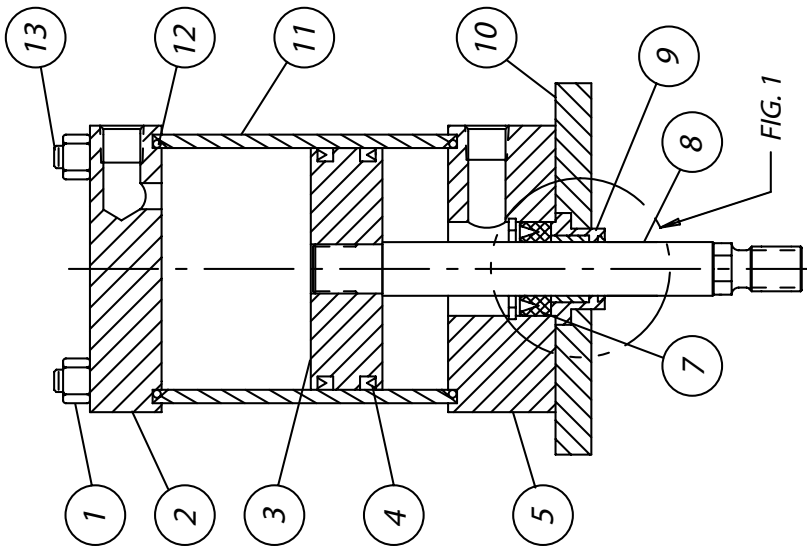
Single Rod Cylinder (8 in. - 14 in. Bore)
